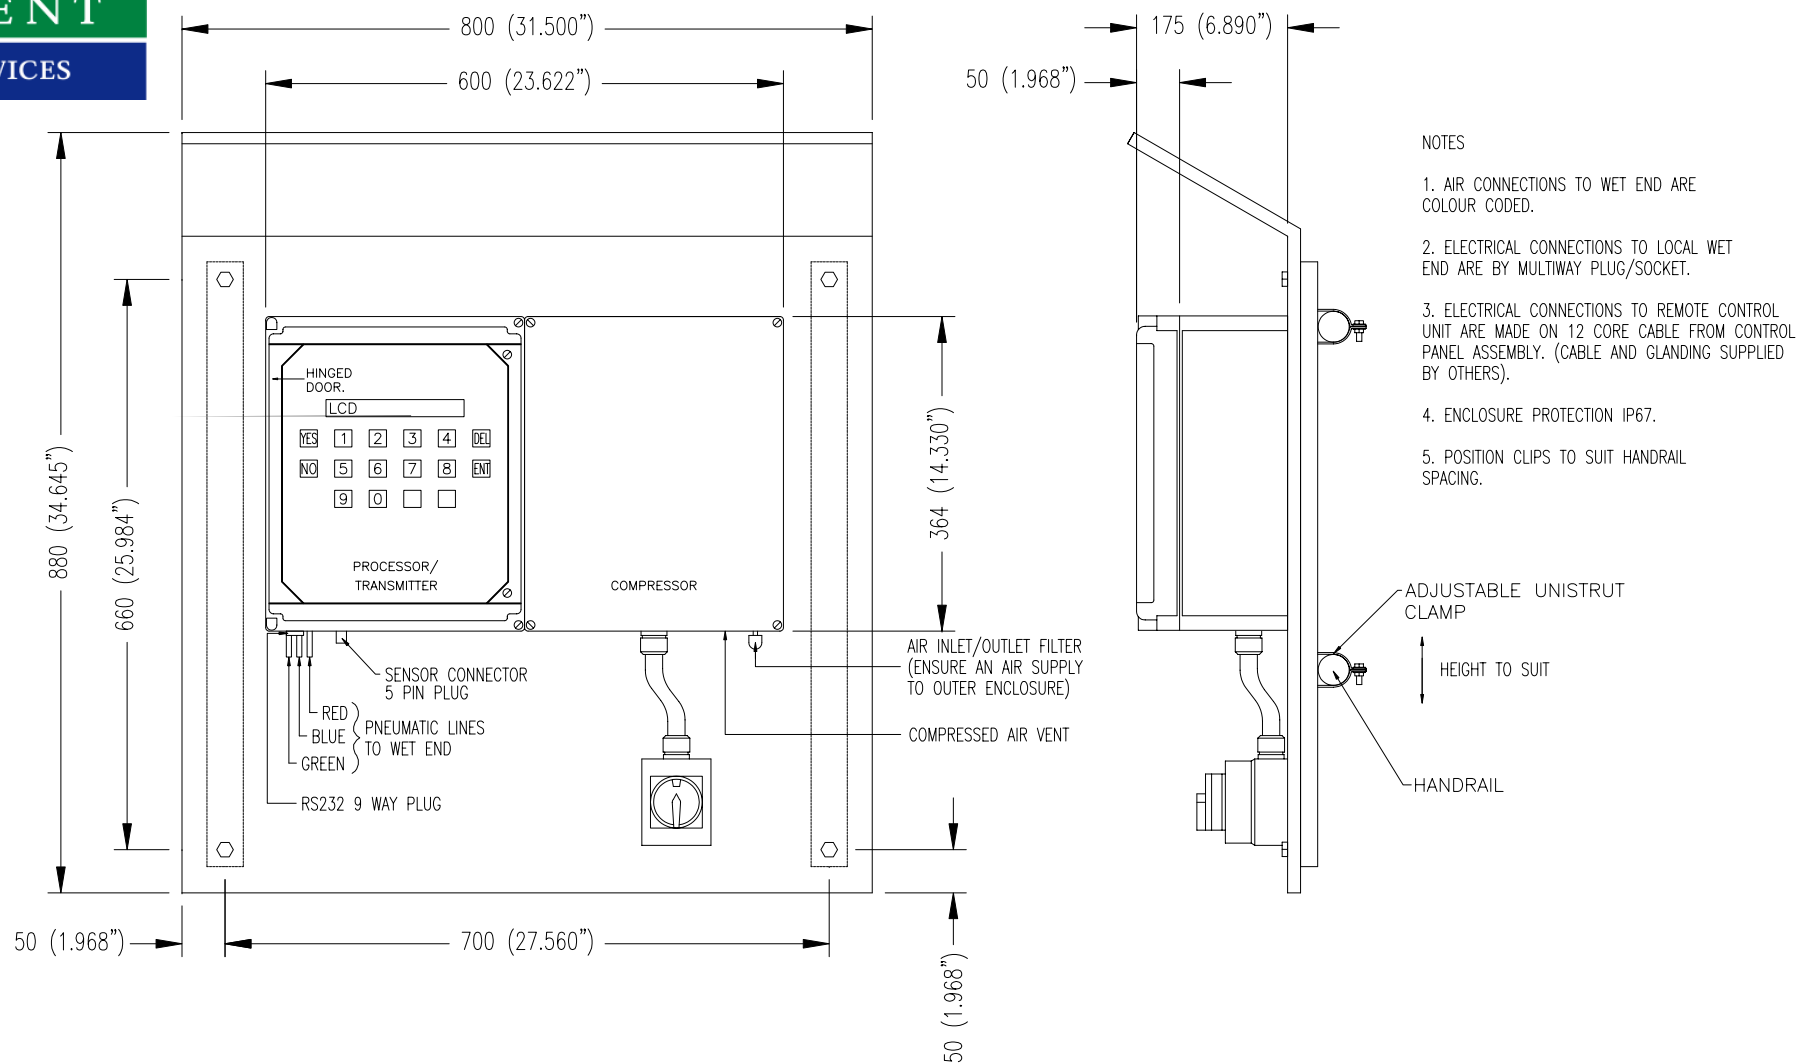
System Dimensions (with optional mounting panel & integral compressor) - units in millimetres
